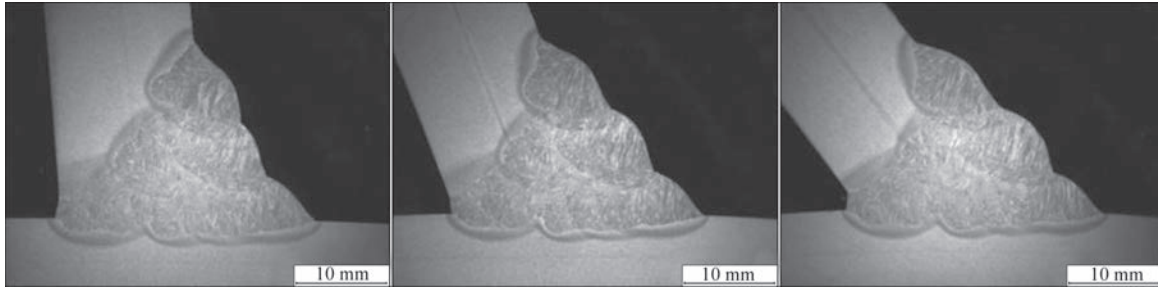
Macrosections on a robotic T-joint weld
